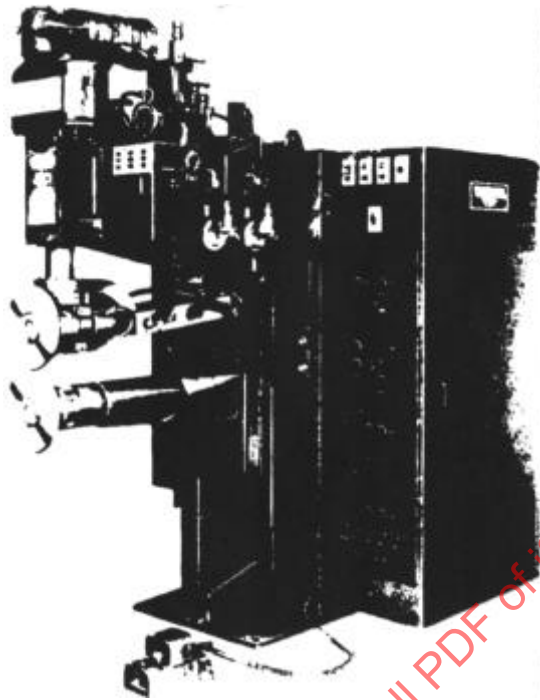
RESISTANCE SEAM WELDING MACHINE
